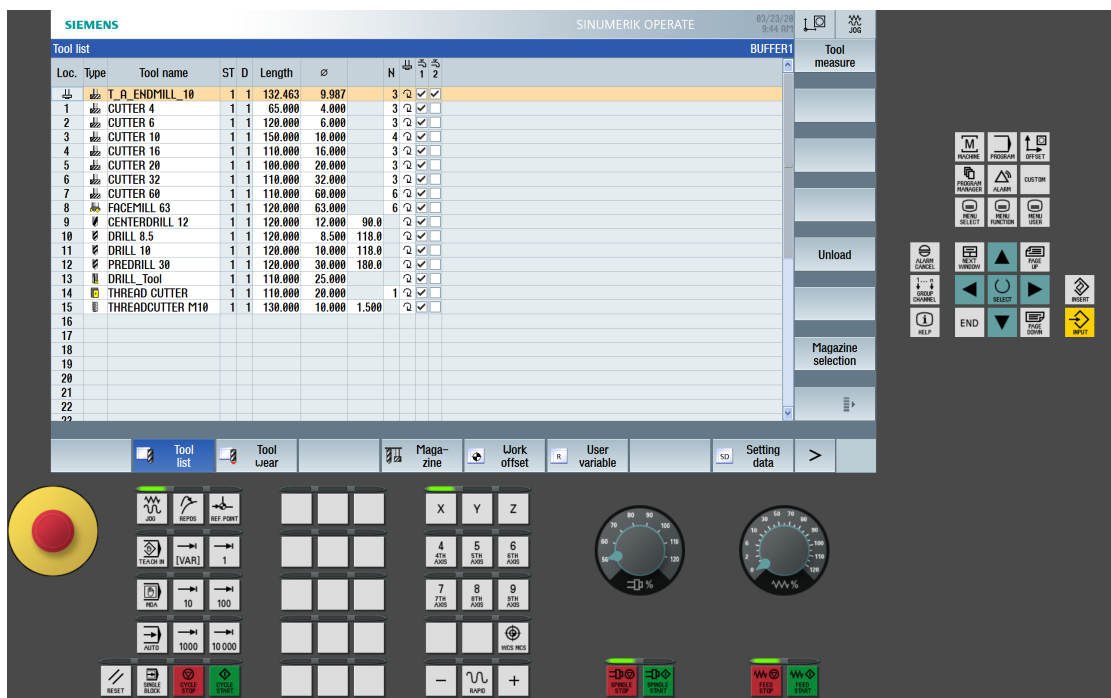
Internal tool management of a milling machine tool with a Sinumerik 840D sl control
